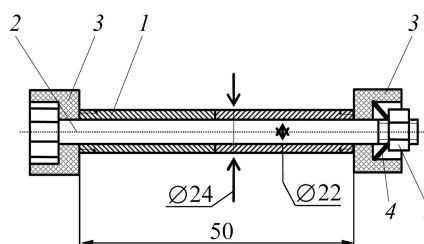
Scheme for coating samples to determine the value of its cohesive strength: 1 – sample surface for spraying coatings; 2 – pin; 3 – protecting flanger; 4 – spring; 5 – nut.
